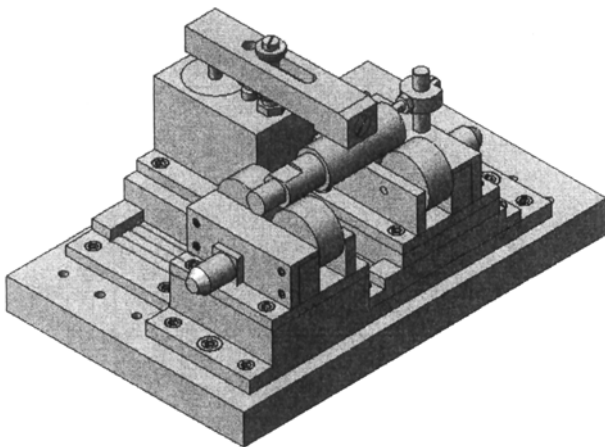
Locating of stepped shaft in drilling and milling machine.
